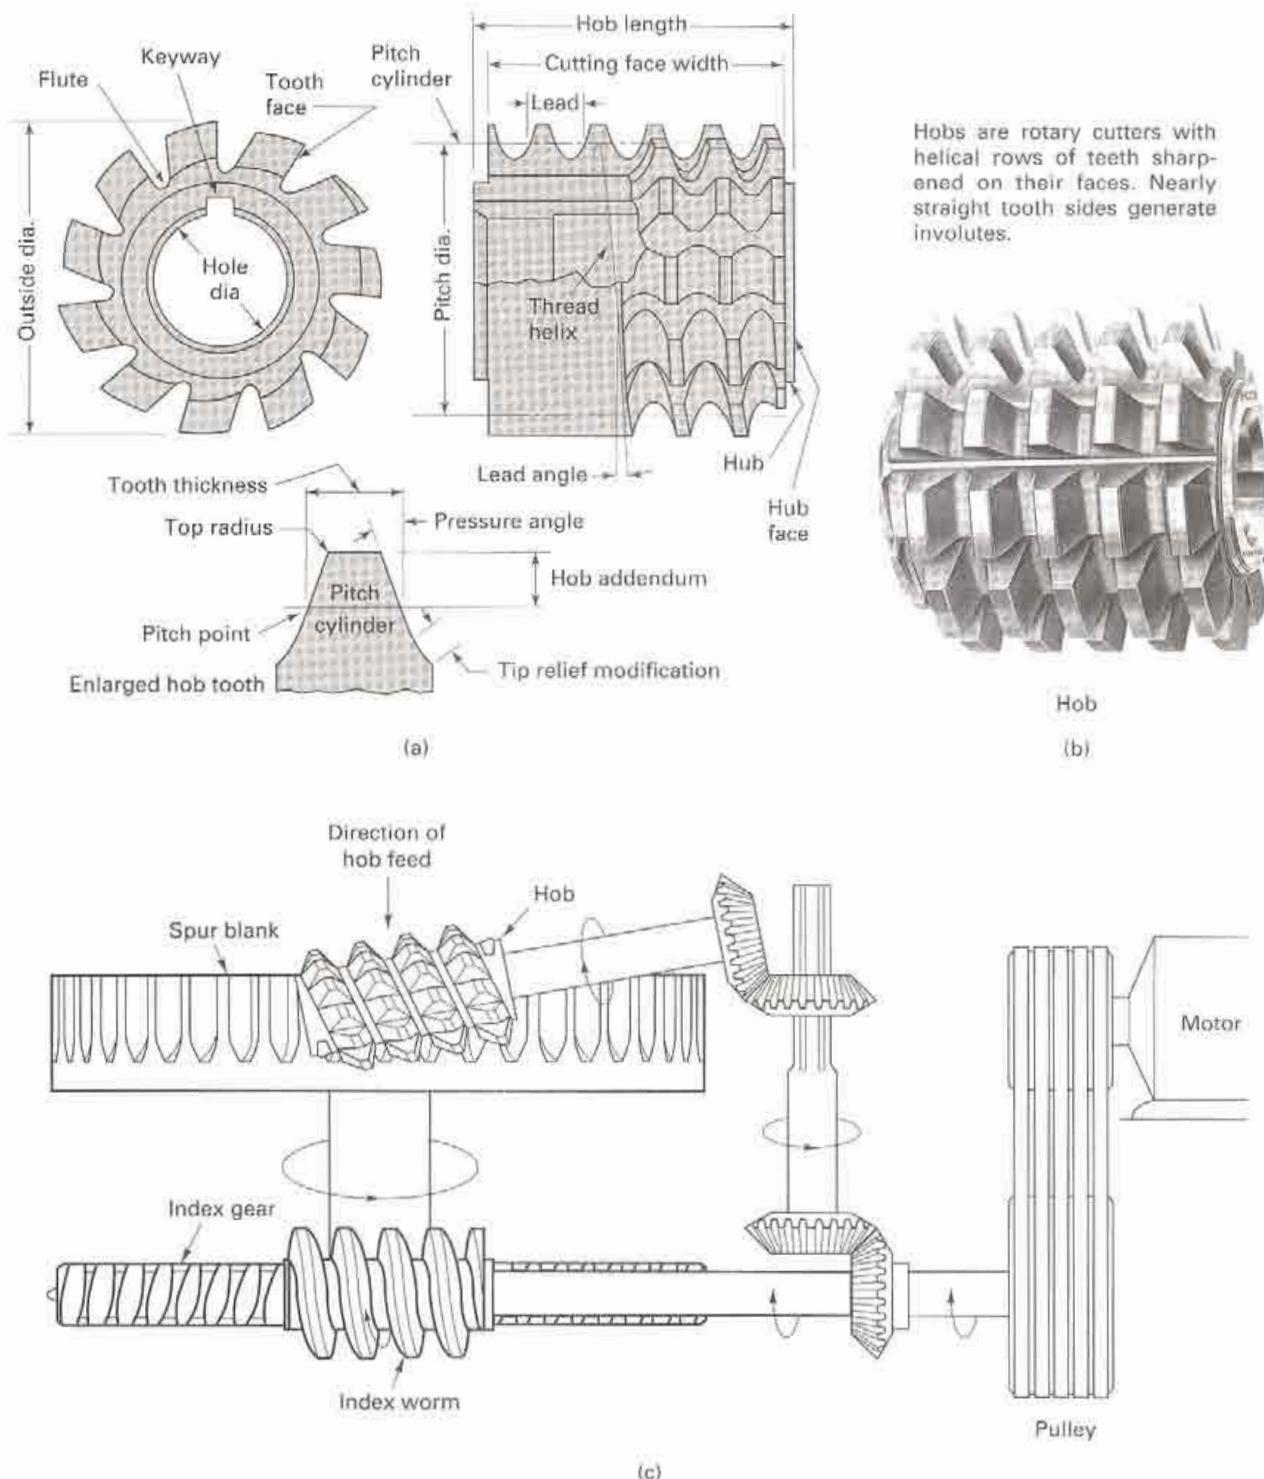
(a) Three views of hob and gear blanks (small spur gear). (b) Hob. (c) Schematic of mechanism of a hobbing machine, shown hobbing a large spur gear.
